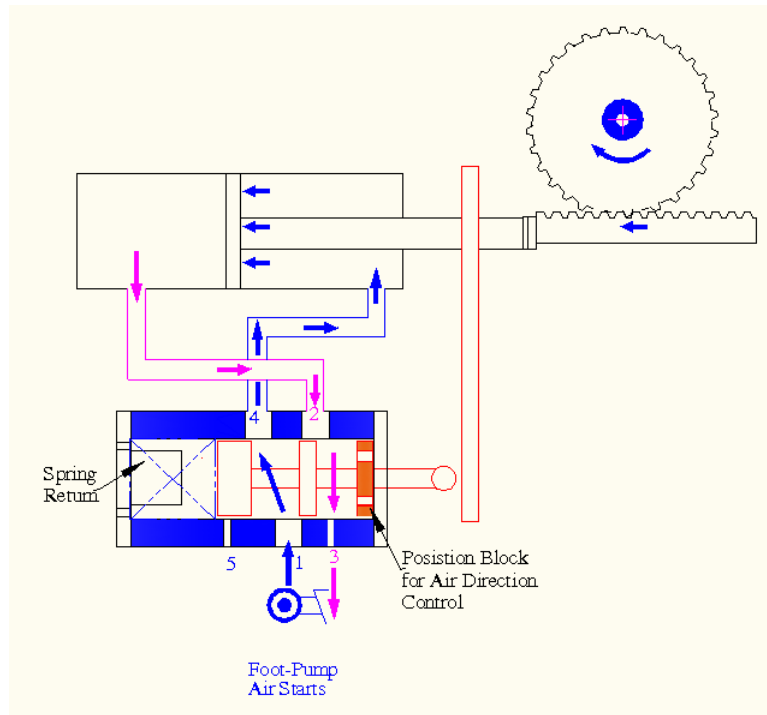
The Air Cylinder Is Moving to the Retract Position.
